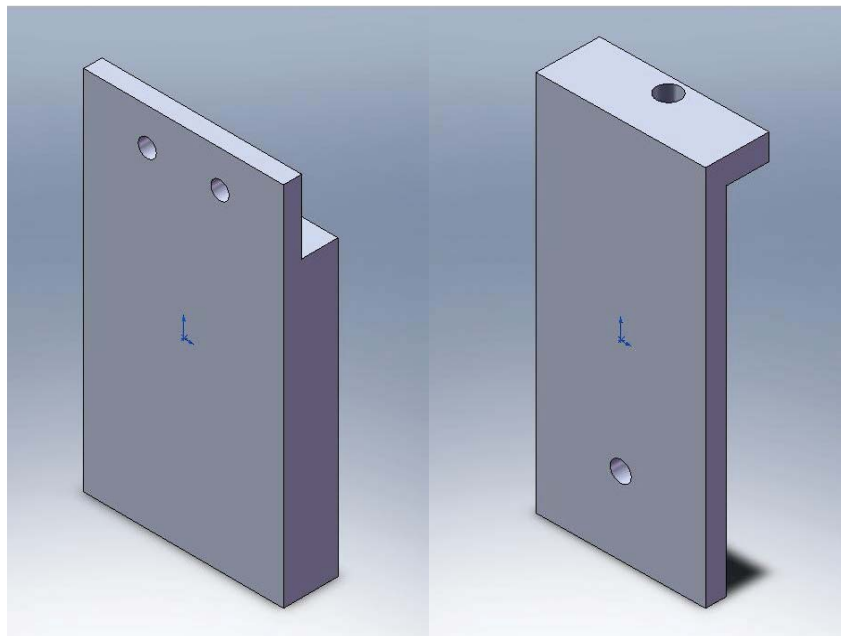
(LEFT) Customized aluminum shear platen designed to be attached to the 1 kg load cell on the Mach-1TM testing system with two #6 - 32 x 1/2 USS socket head cap screws and secured with two #6 - 32 hex nuts. (RIGHT) Customized aluminum L-shaped component designed to be bolted into a test stand with one M6 x 1.0 x 10 Phillips Pan Head machine screw.
